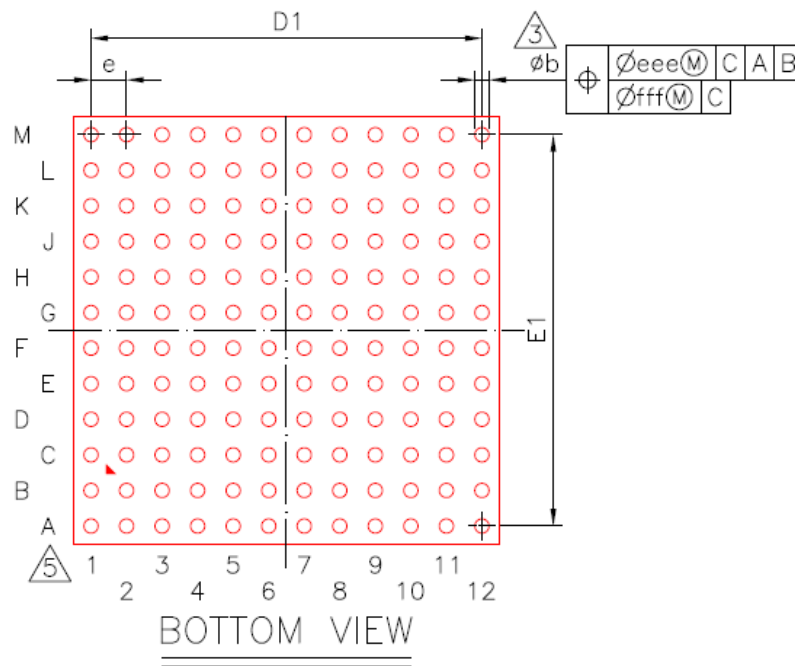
Package Outline Drawing of 144TFBGA 9x9mm²
